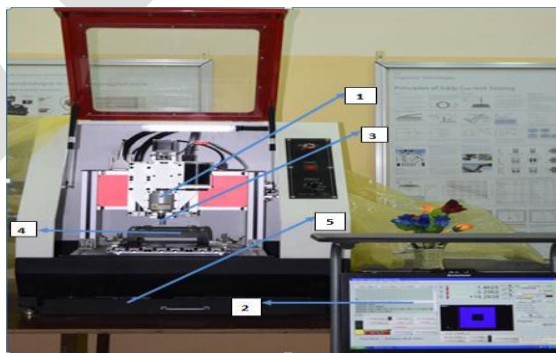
(CNC) milling machine used in this work; 1. Movable head, 2. Machine controller, 3. Tool holder, 4. Forming frame, 5. Machine table.
